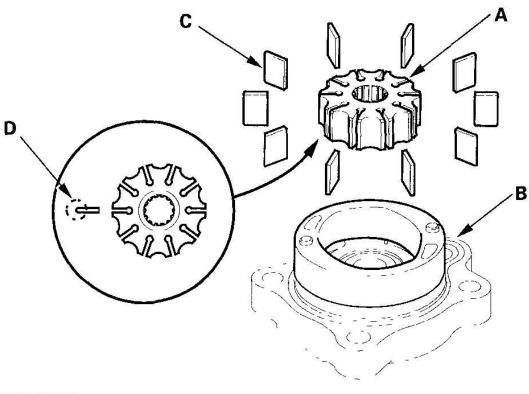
Setting Pump Cam Ring Over Two Roll Pins Courtesy of AMERICAN HONDA MOTOR CO., INC.
